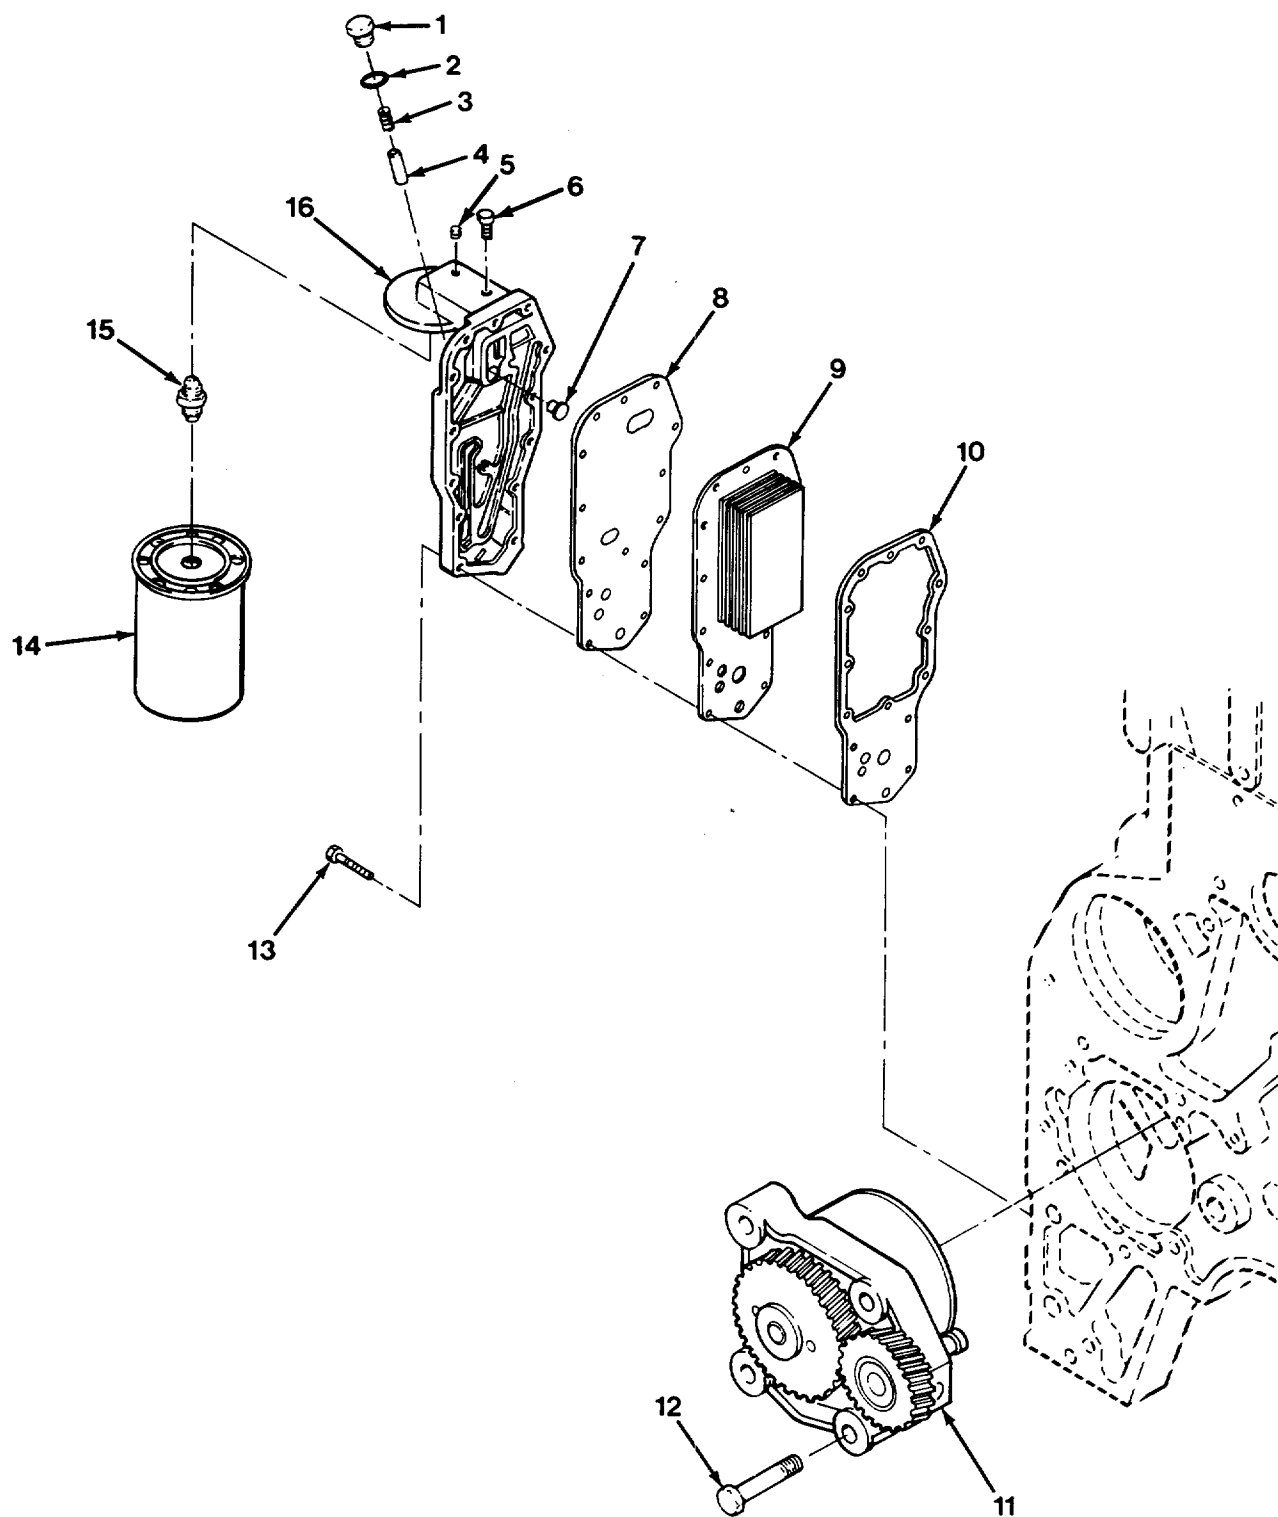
OIL PUMP, FILTER AND COOLER ASSEMBLY
